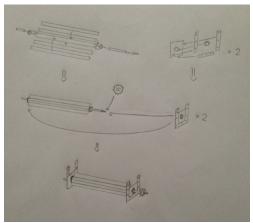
Exploded view of the rotating bar and its attachment boards.
